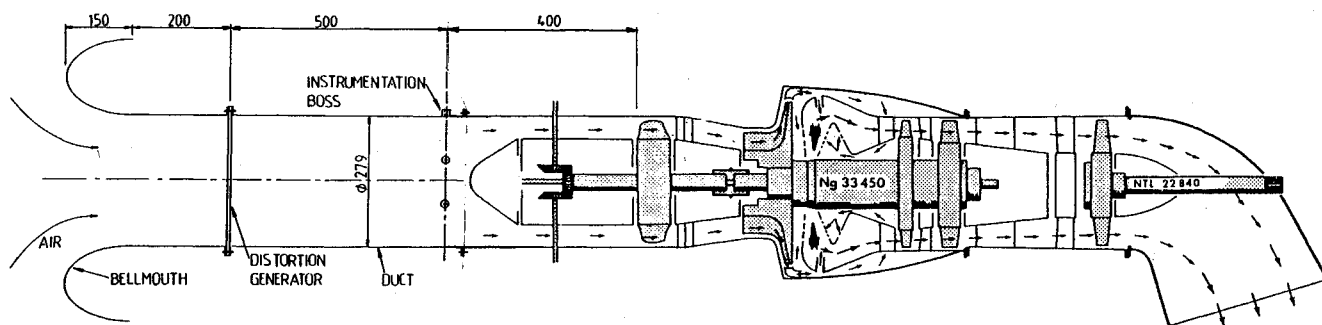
General arrangement of Turbomeca Turmo IVB gas turbine and inlet cowl. Dimensions in mm.
